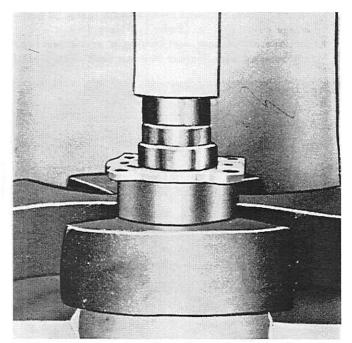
Installing Sealed Ball Bearing in Top of End Cap
